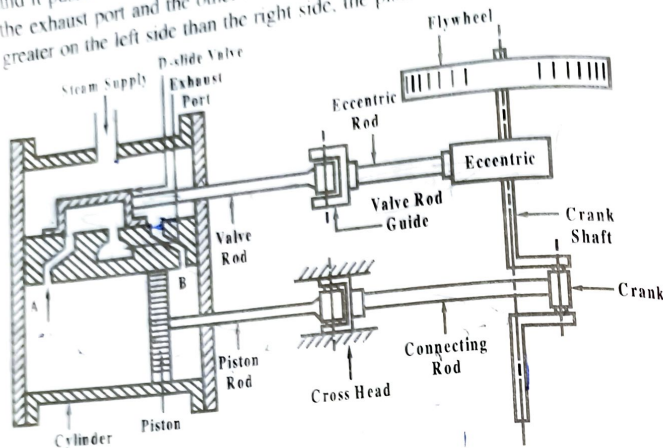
Single Cylinder Double Acting Horizontal Reciprocating Steam Engine
